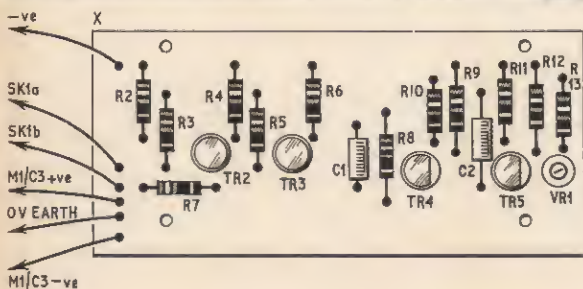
Layout of the anemometer circuit on a printed circuit board
